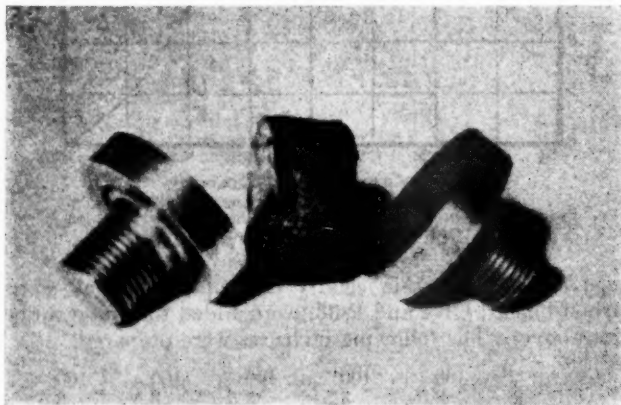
Three parts of the test-specimen before assembly. The coating of adhesive is visible on the right-hand sectional part.
